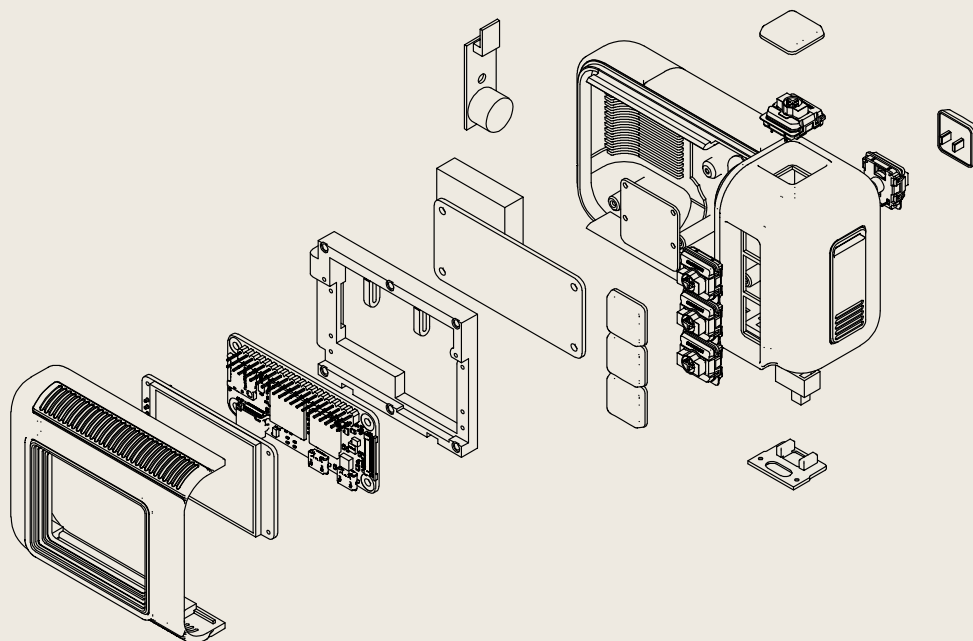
Exploded view: how the printed parts, boards and battery stack inside the shell.
